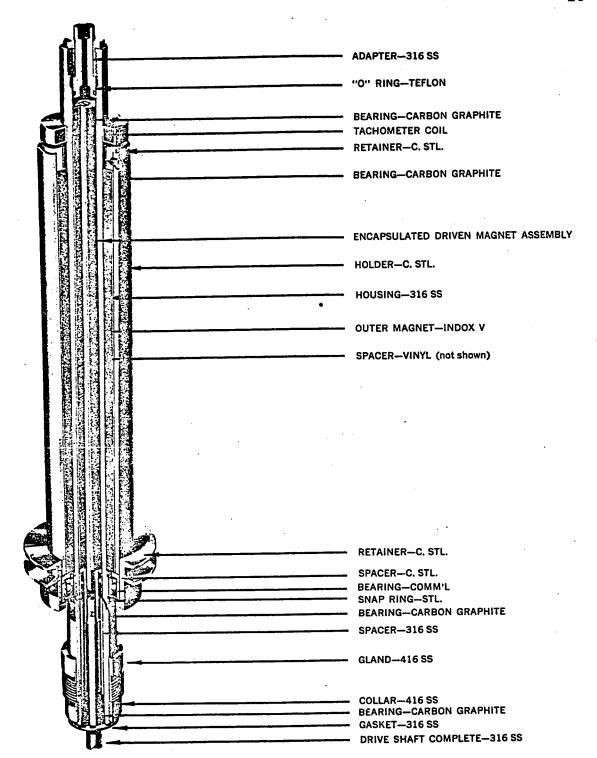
MAGNEDRIVE ASSEMBLY WITH ENCAPSULATED DRIVEN MAGNETS. (Autoclave Eng. Inc.)
